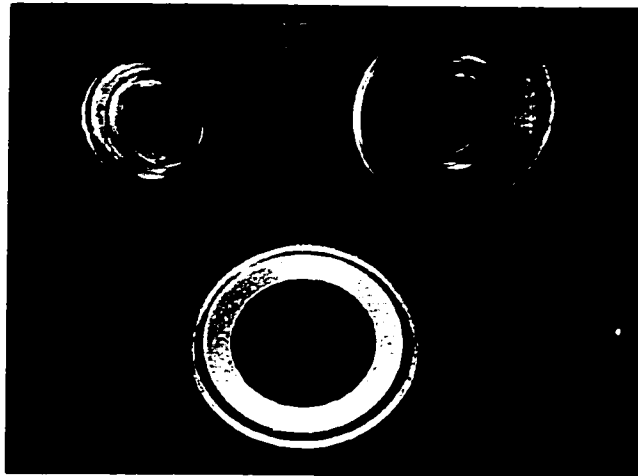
Laser welded reaction annulus for the Chrysler 45RFE transmission. The parts are welded at an average speed of 100mm/s with a 6kW CO₂ laser. With a weld circumference of 11.5 inches, these parts weld in roughly three seconds. (photo courtesy of TRIAM Powerlasers)
